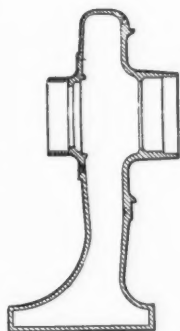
Pressed-Steel Rear Wheel for Internal-Gear Drive
